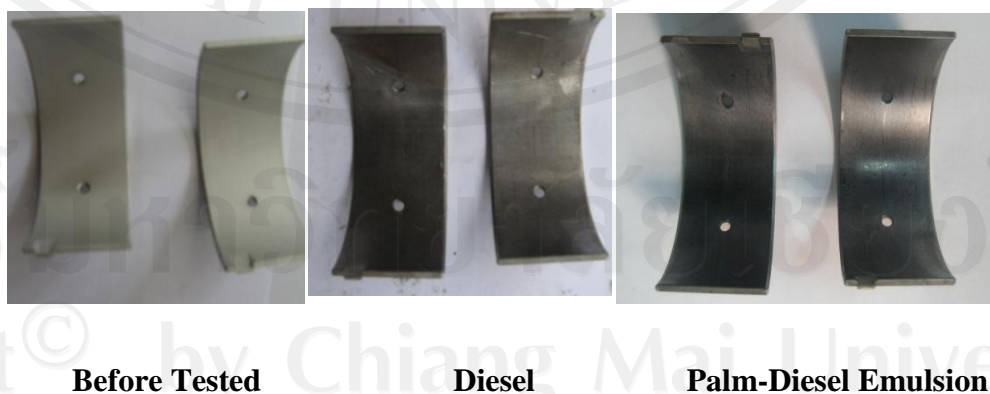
Wear at the crank shaft bearing for the fuel oil and the emulsified Diesel/CPO/water of 90/5/5 after 200 h operation.
